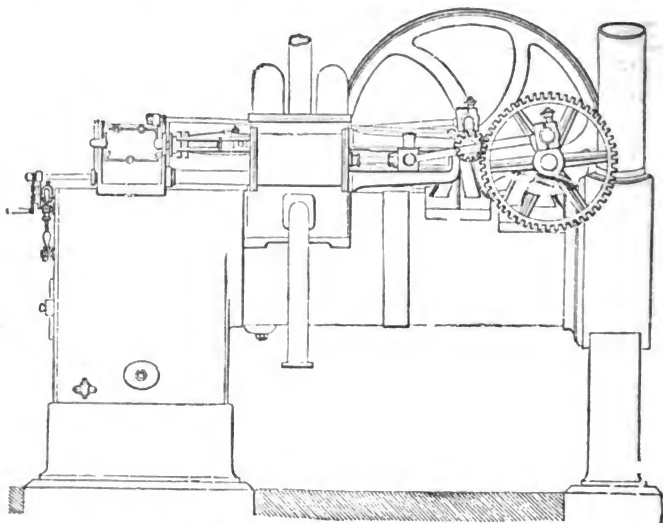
Semi-portable Steam-pump and Boiler. Side Elevation.
